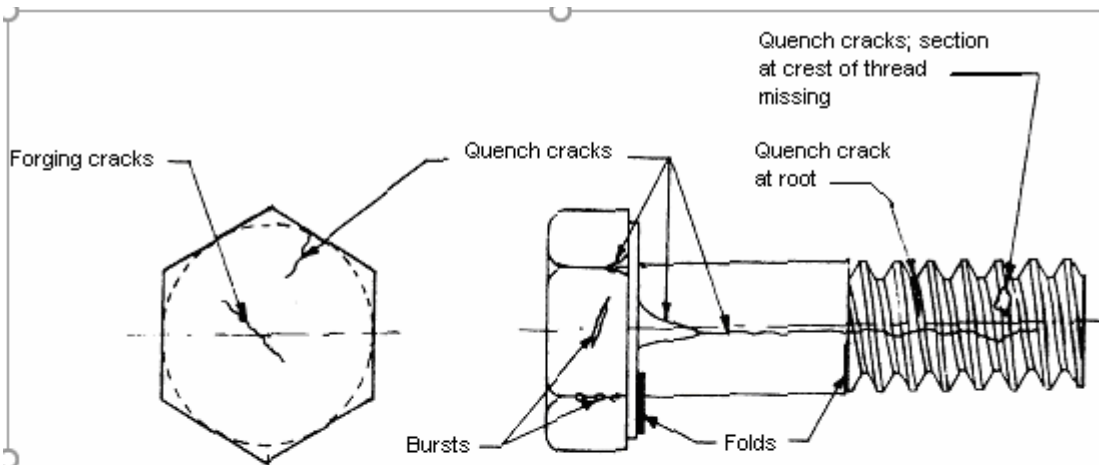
Forging and quench cracks, folds and bursts in screws
